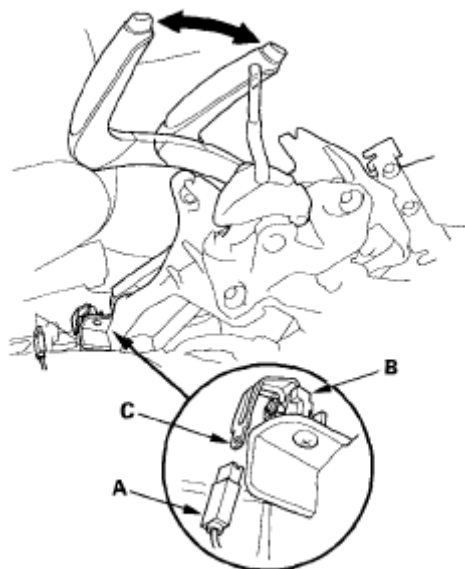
Disconnecting Parking Brake Switch Connector From Parking Brake Switch
